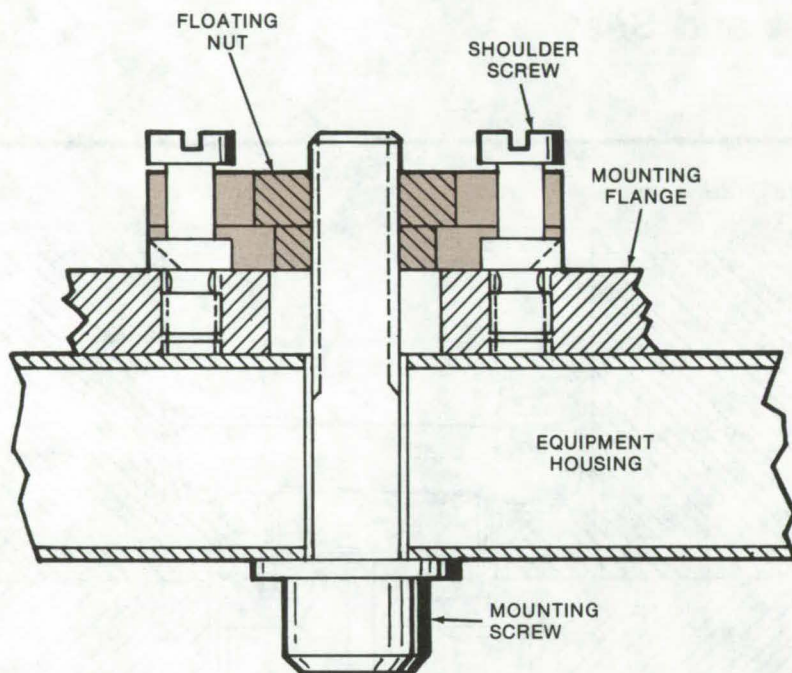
Floating Nut Assembly uses a pair of shoulder screws to lock the nut while allowing some float. The main connection is to a back-mounted screw that passes through an oversized hole in the mounting flange attached to the equipment housing.
